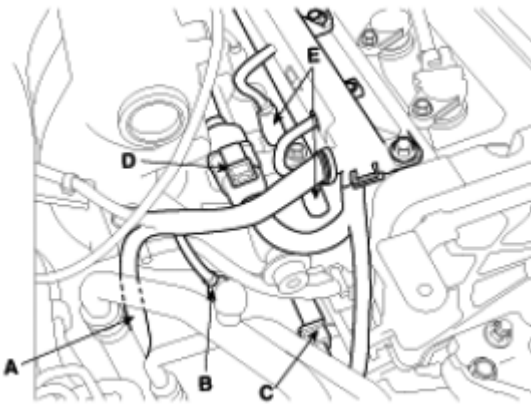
Identifying Rear Oxygen Sensor Connector, Air Conditioner Compressor Switch Connector And Knock Sensor Connector
